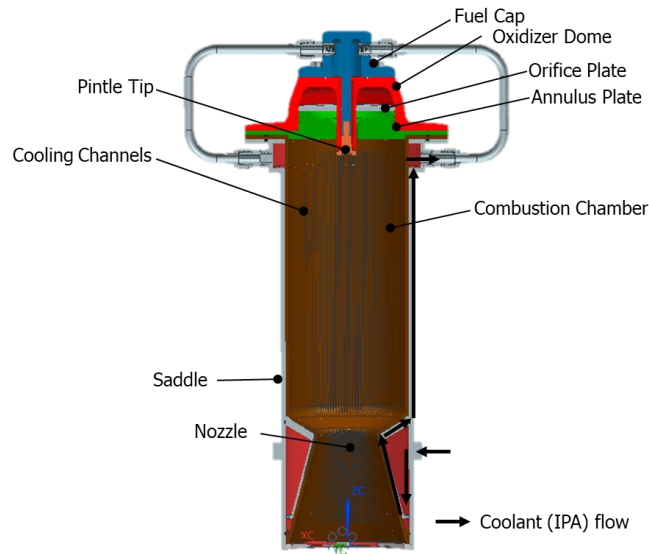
Cut sectional view of LOX-IPA engine of WIRES#013
